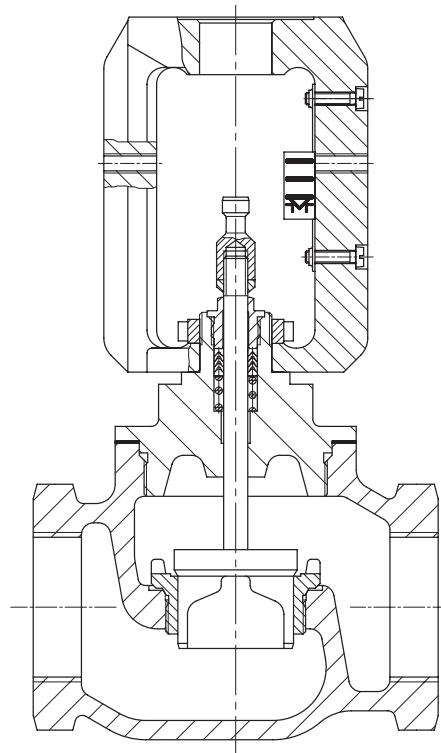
Type 3522, NPS 1¼ to 2, version with forged yoke design, threaded ends
